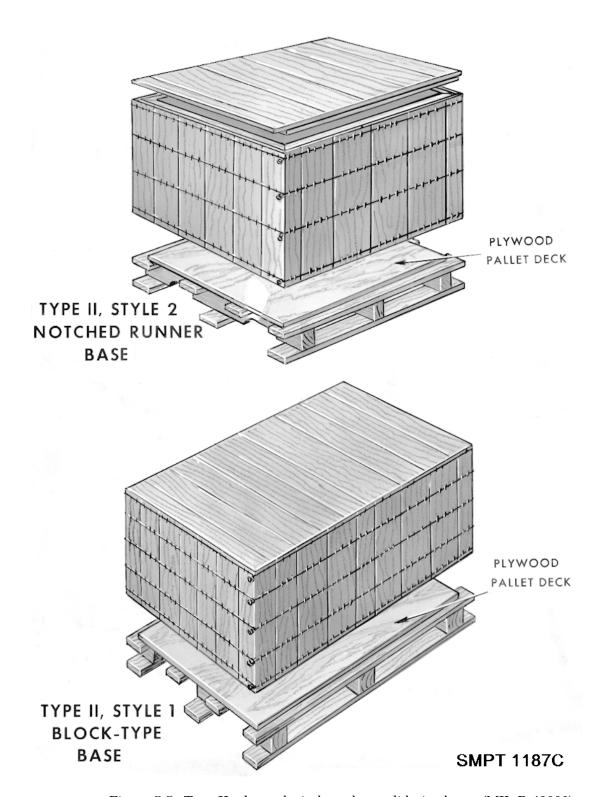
Type II, plywood wirebound consolidation boxes (MIL-B-43666).
